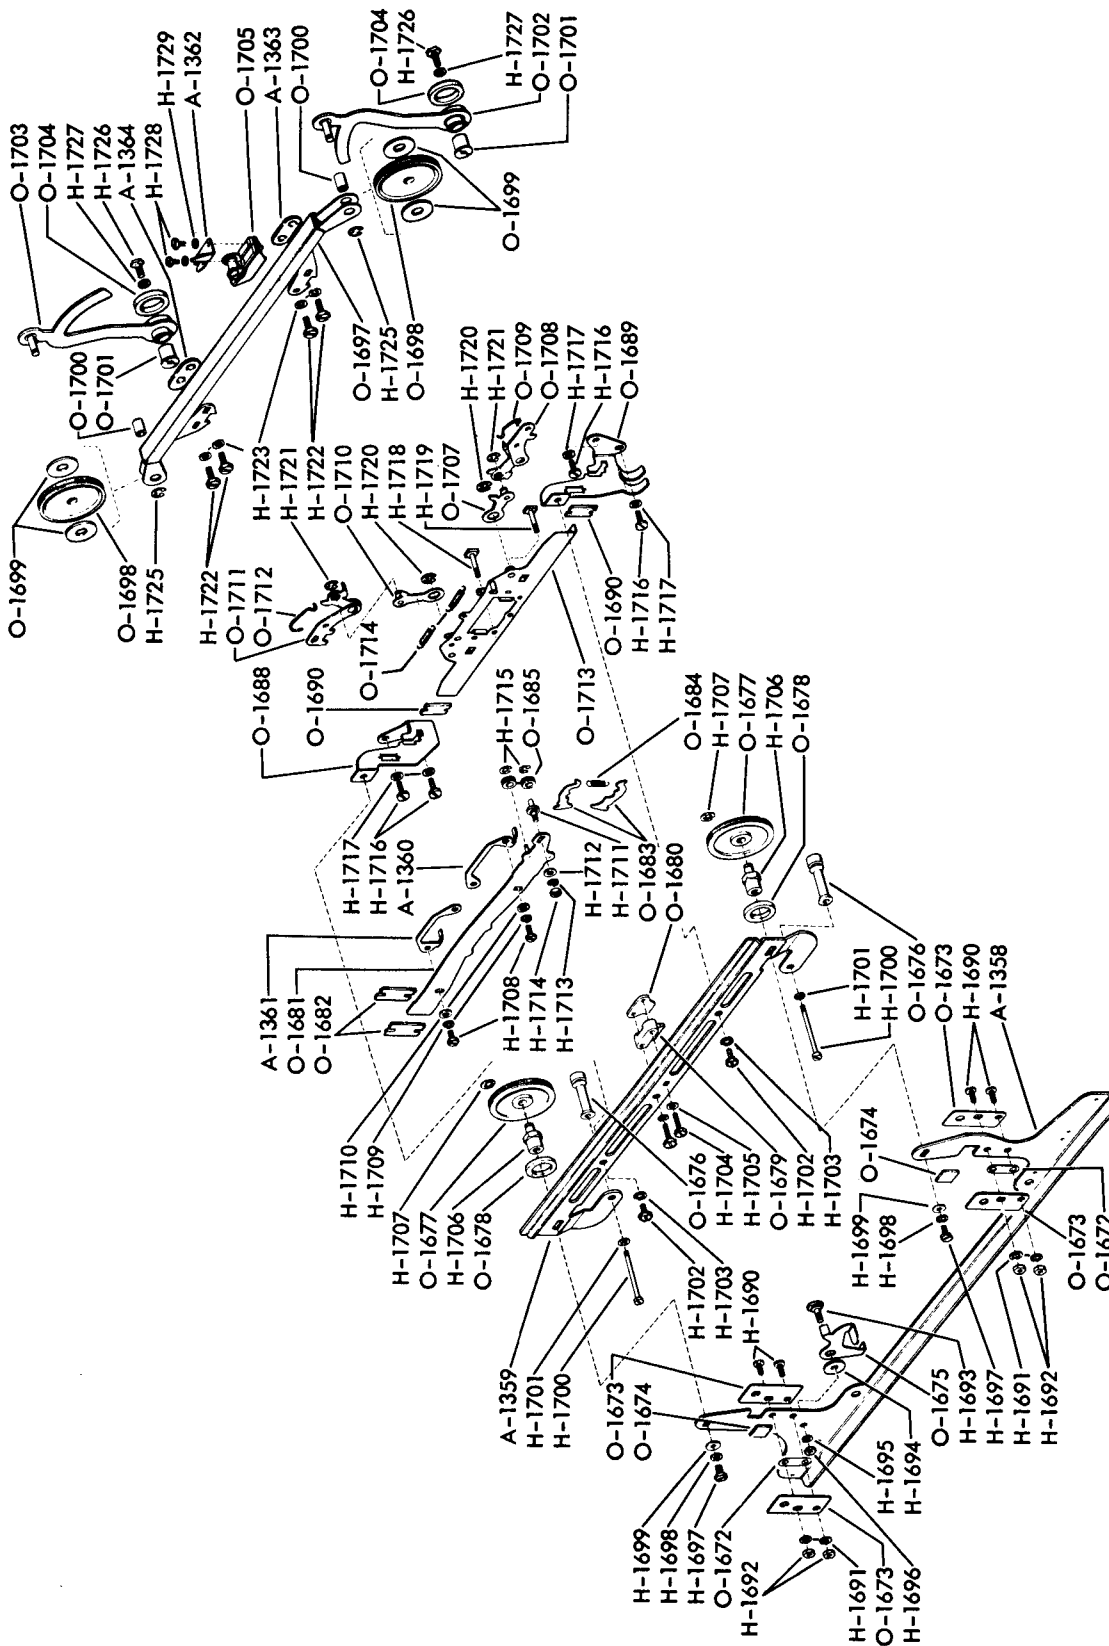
Automatic Typewriter, Front Plate Mechanism
